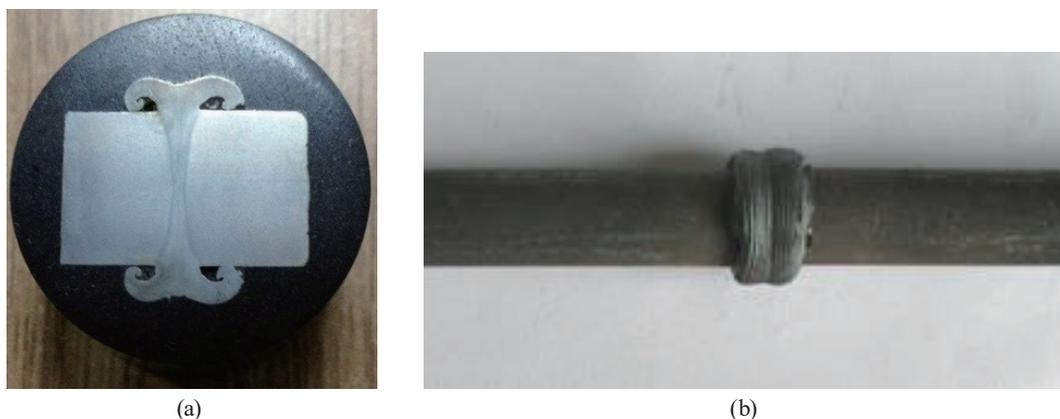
(Color online) 700-MPa-grade UFG steel friction-welded joint.
